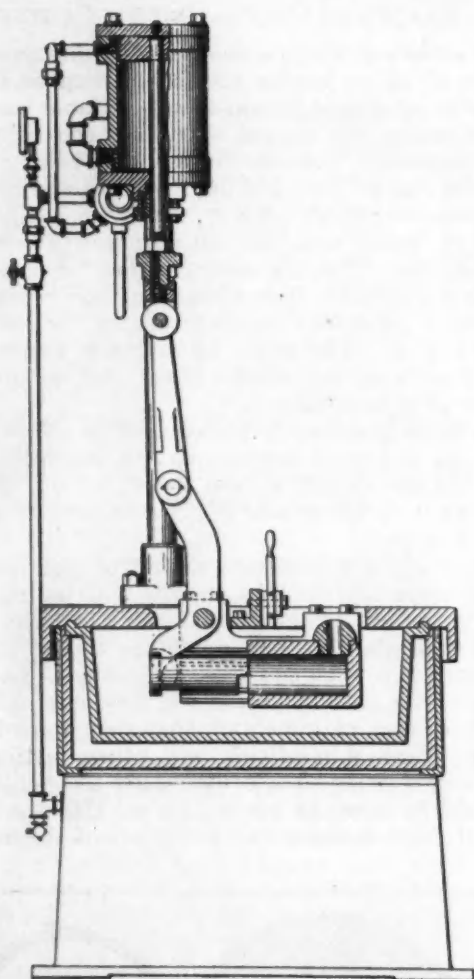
PLUNGER TYPE OF CASTING MACHINE
